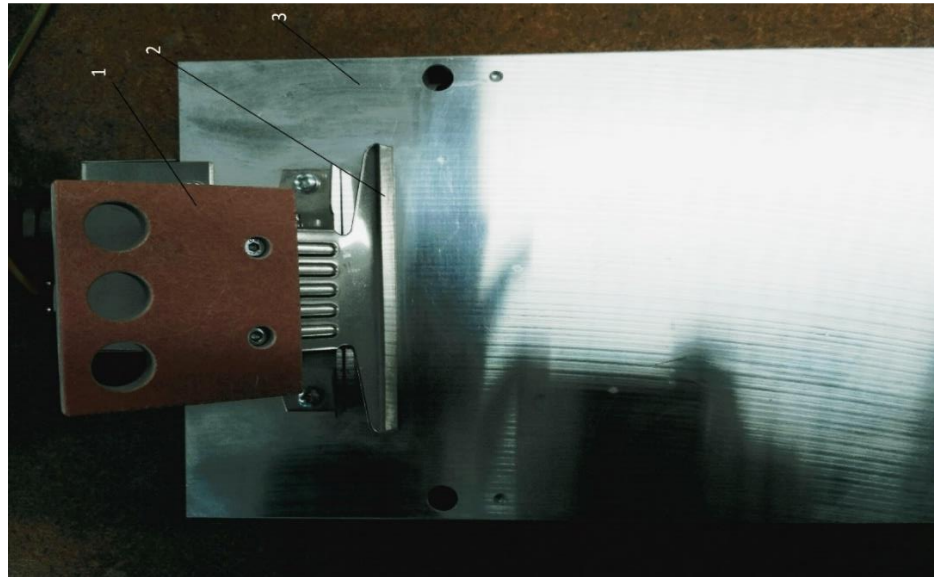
Aluminum plain surface with heated coil or material inside.
